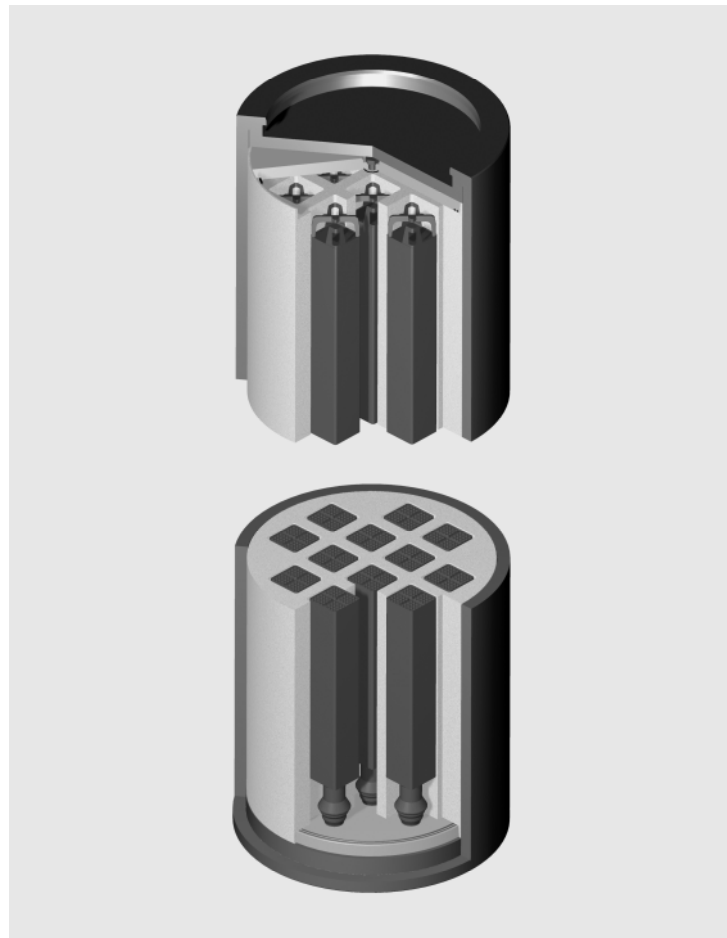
Overall view of a spent BWR fuel disposal canister illustrating the cast iron insert and outer copper shell corrosion barrier.
